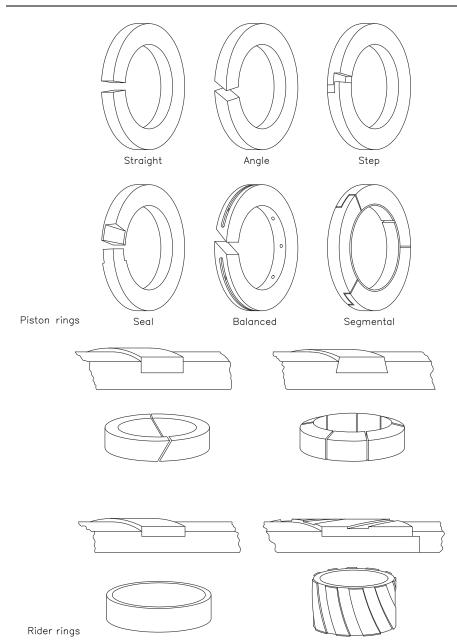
Piston rings and rider rings. Courtesy of the Cooper Cameron Corporation.
